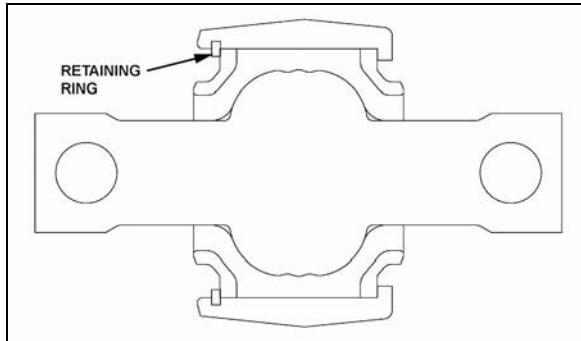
UPPER A-ARM BALL JOINTS 16115
